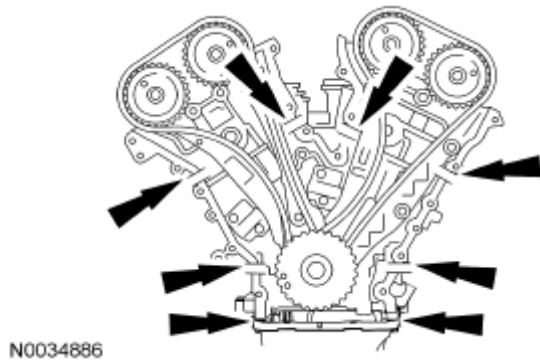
Locating Diameter Dot Of Silicone Gasket
